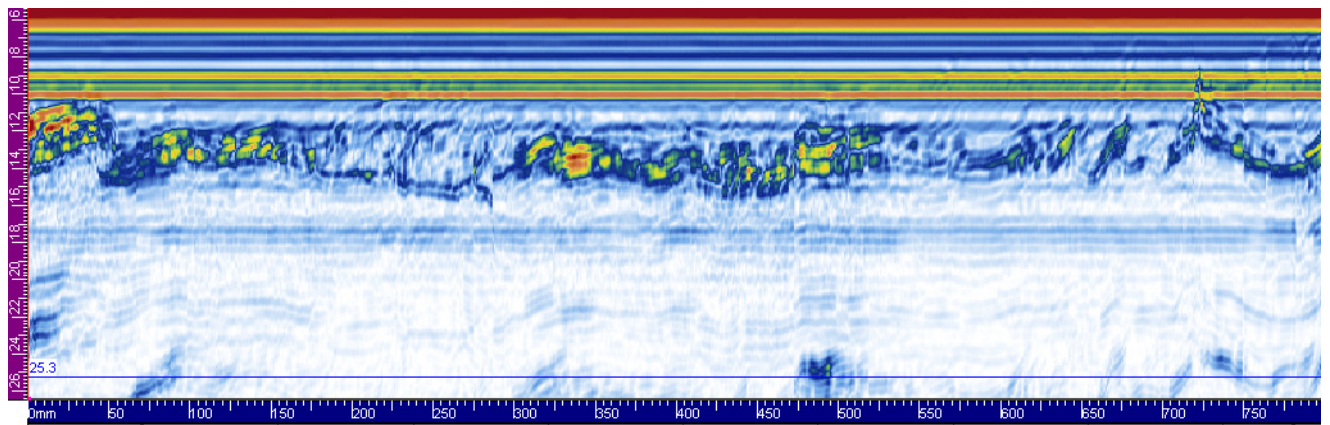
Typical scan of T-joint welded sample with no flaws.
